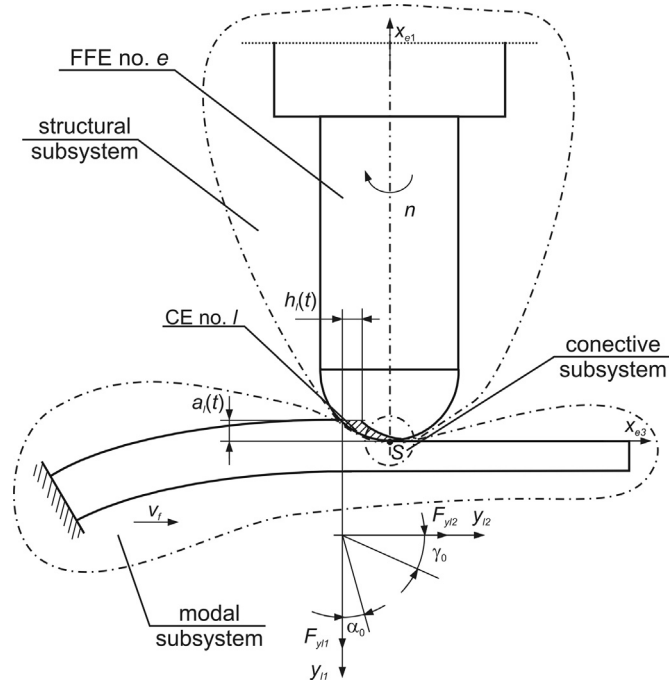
Scheme of a slender ball end milling of one-side-supported flexible workpiece.
